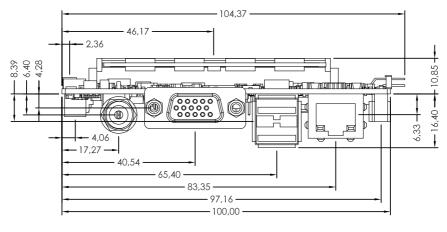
MIO-2261 Mechanical Drawing (Bottom Side) 4 MIO-2261 Startup Manual
